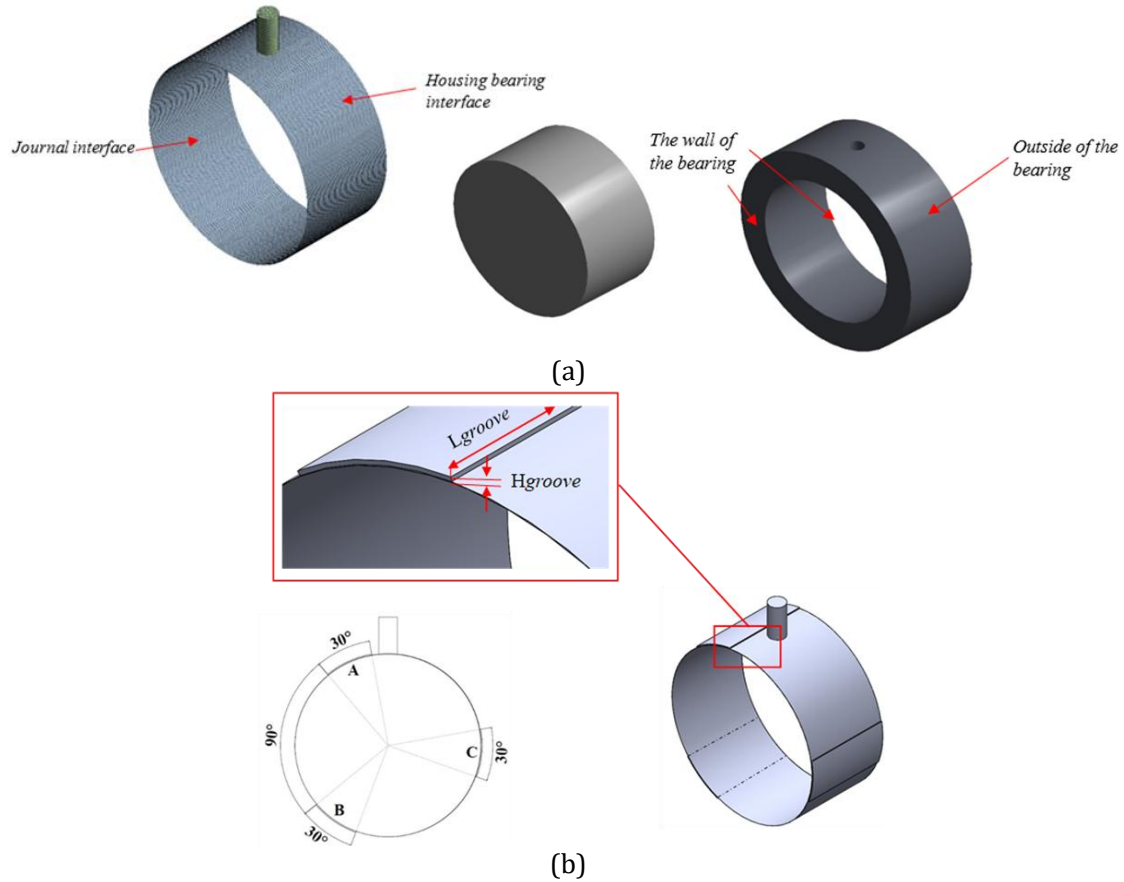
Physical model (a) plain bearing; (b) multistep journal bearing.
